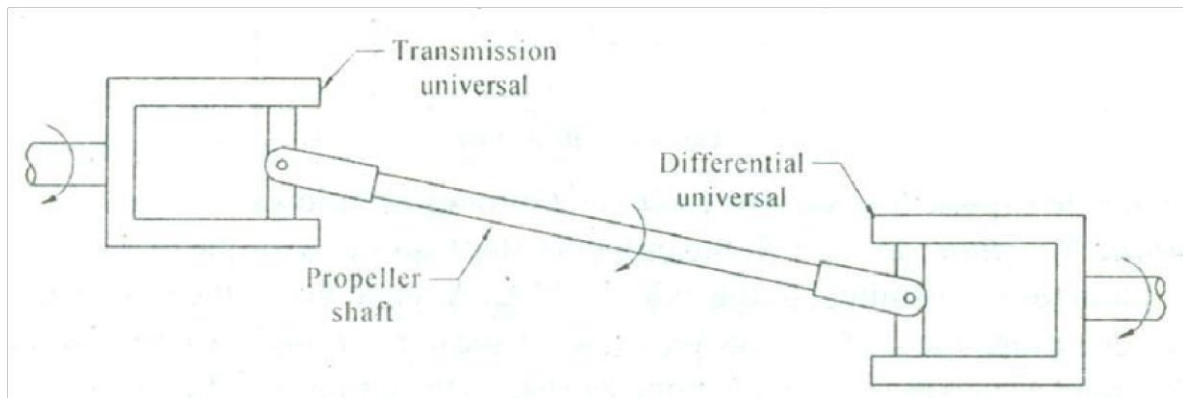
(b): Universal joints in action. As rear axle moves up and down, universals allow drive angles to change with out bending propeller shaft.
